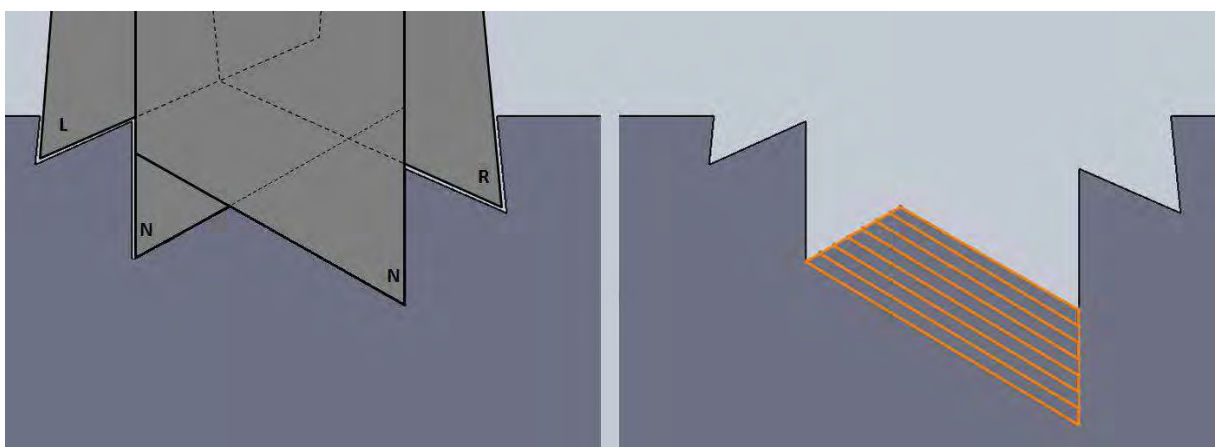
CAD drawing of tooth paths for bevelled (U28° and GT) teeth
